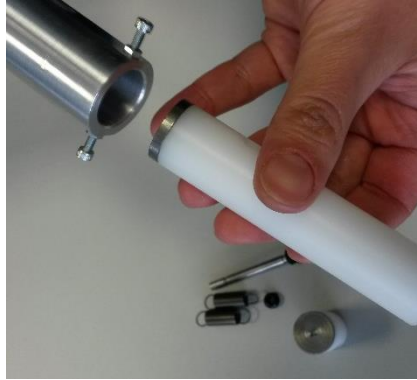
Remove the ball-bearing propulsion accessory. Fit the carriage propulsion accessory by first inserting the metal part.
